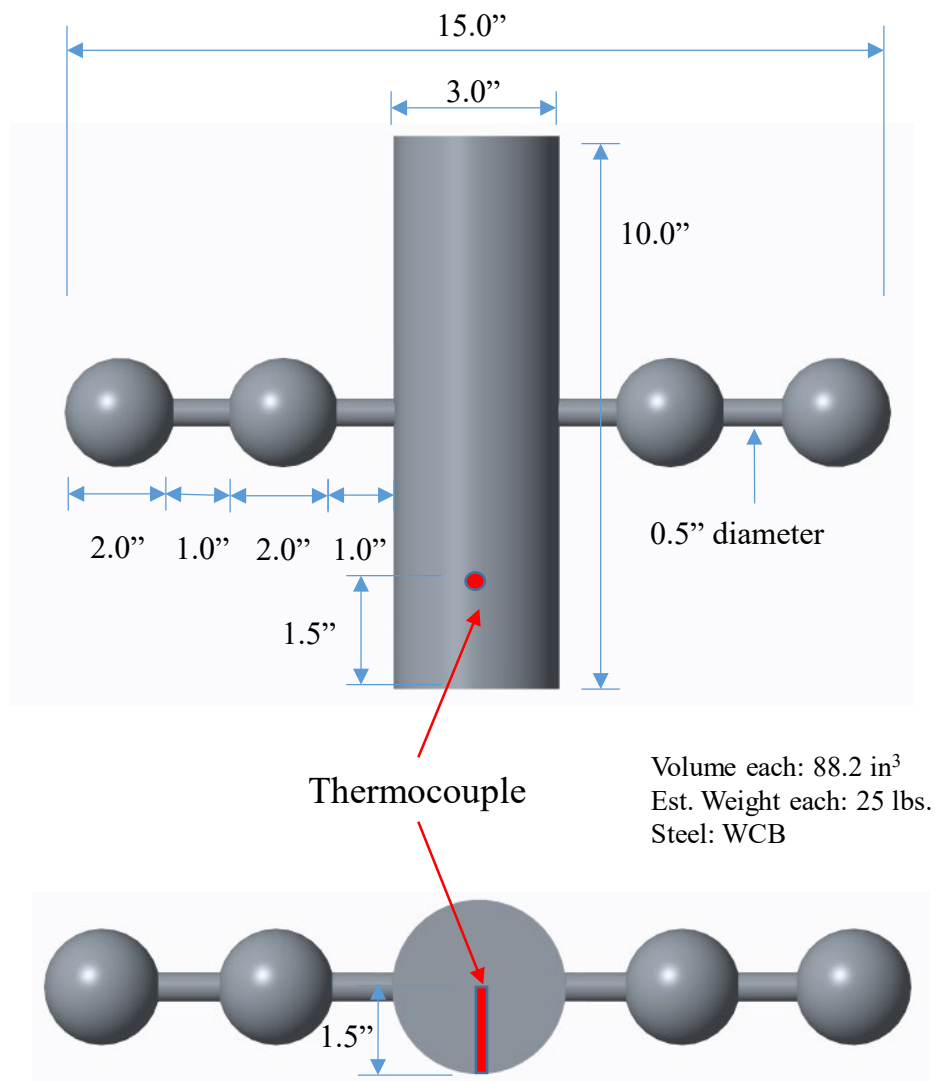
Dimensioned side and top views of porosity experiment case A with a large central sprue/feeder and four spherical castings showing location of thermocouple placement.
